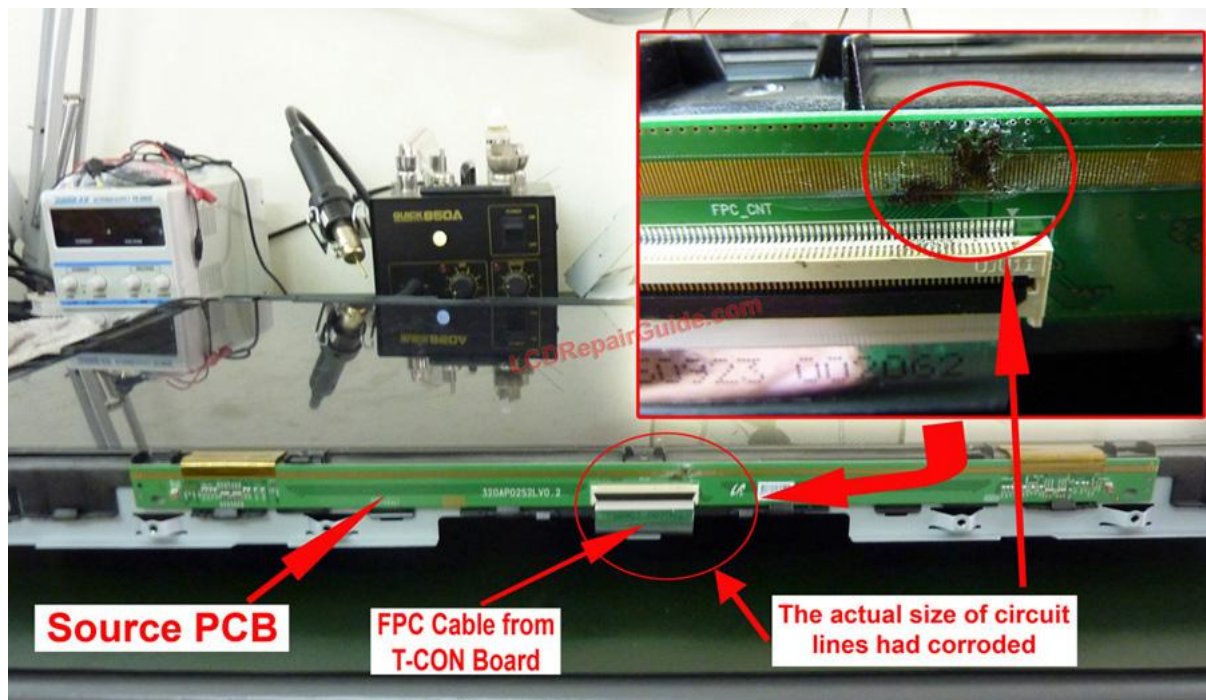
Opened the front metal cover and found Source PCB board was inside LCD Panel.
